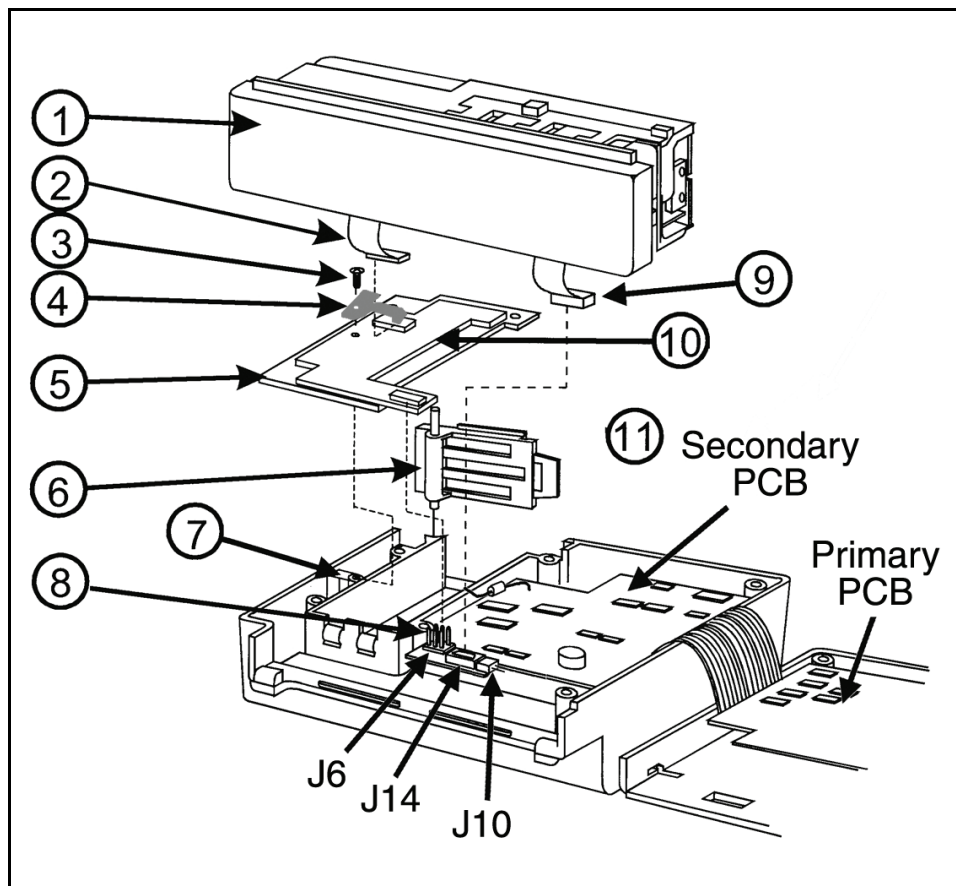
Mechanism Assembly, DDMM PCBA, and Battery Wall Removal
